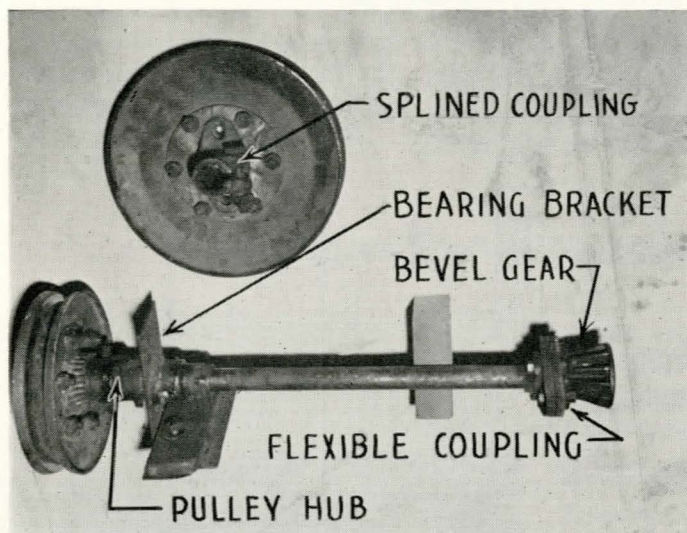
Convenient pulley sizes are 8-inch and 12-inch or 6-inch and 9-inch. Note flexible coupling, roller bearing, and pulleys. The shaft is a 1-inch steel shaft. The flexible coupling could be an old auto universal joint or flexible fabric coupling as used on some of the older autos.
